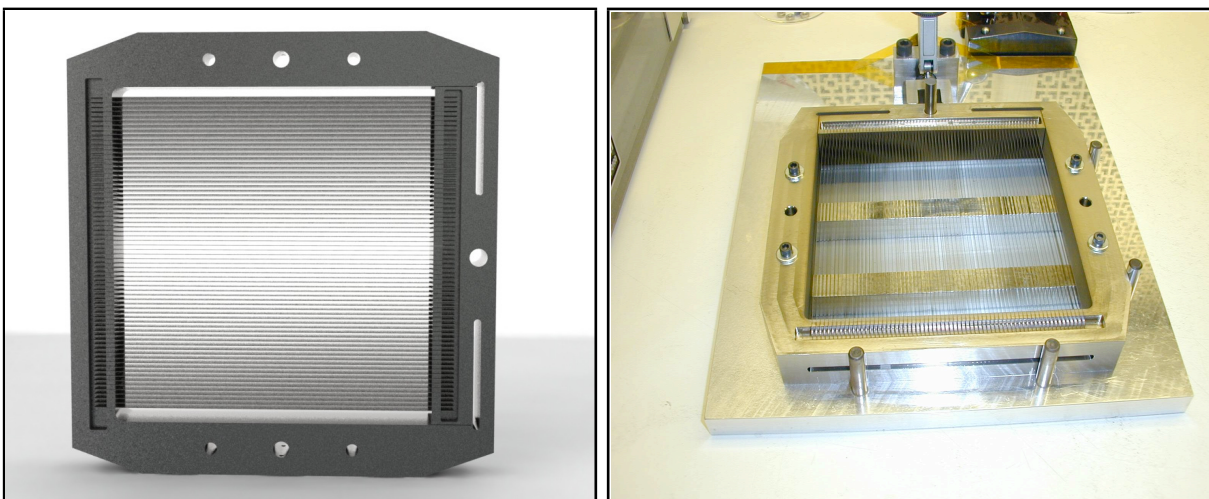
Left - SolidWorks rendering of the grating array. Right - Grating mount after grating installation but before payload assembly.
